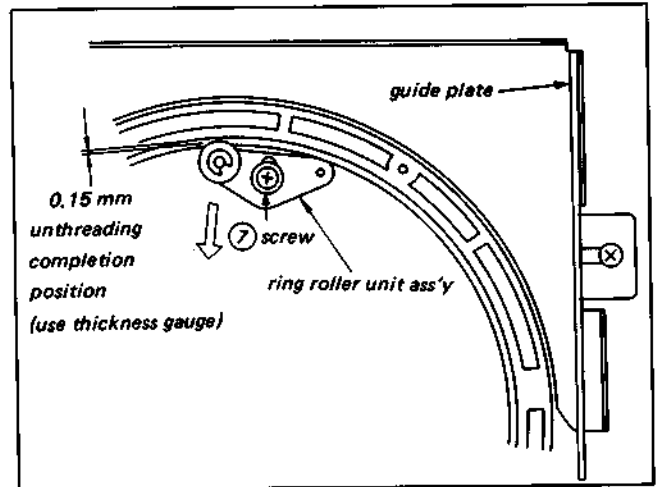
Replacement and adjustment of threading ring ass'y
